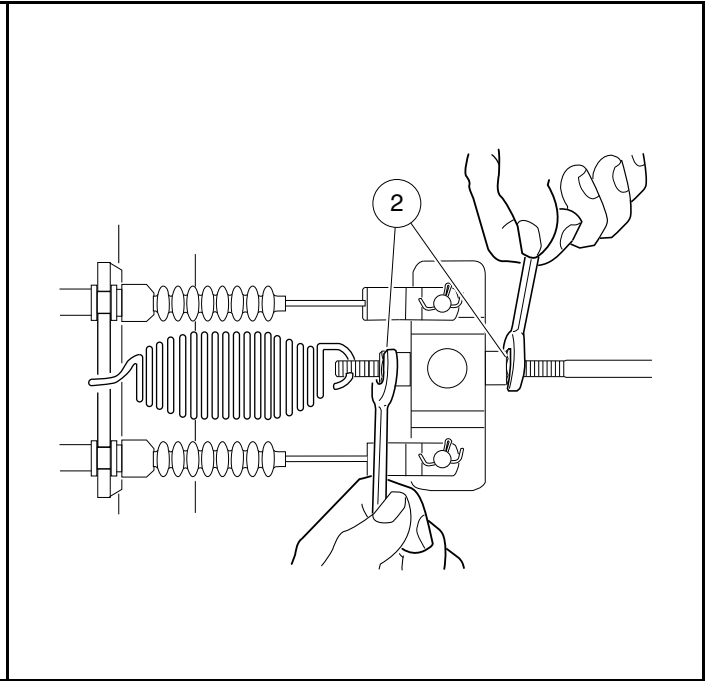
Loosen Front Brake Equalizer Rod Nuts
